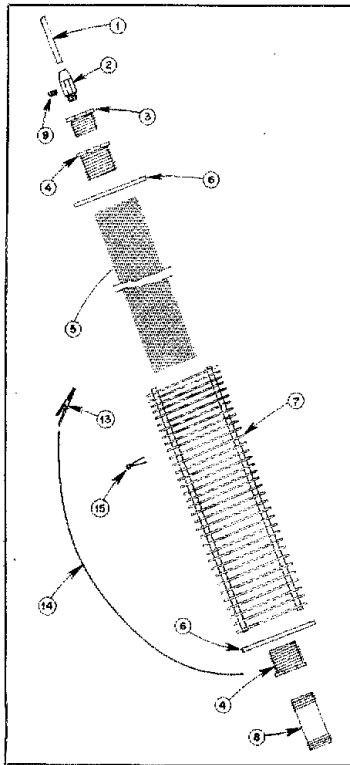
This is an exploded view of the coil assembly. Parts numbers refer to the parts list in Table 1.
